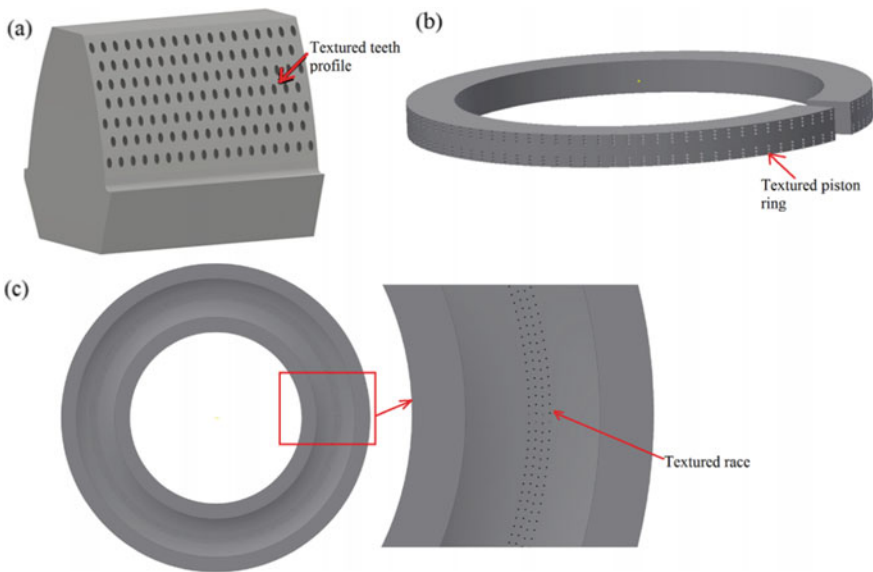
CAD model of a textured: a Gear, b piston ring, c race of ball bearing
